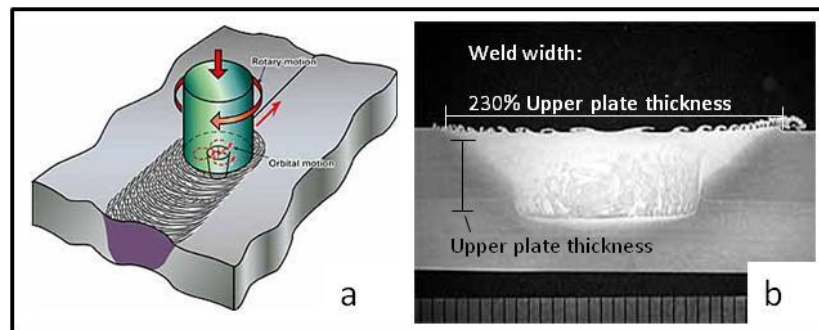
a) Com-Stir™ Principle, b) Weld Region Created using Com-Stir™
